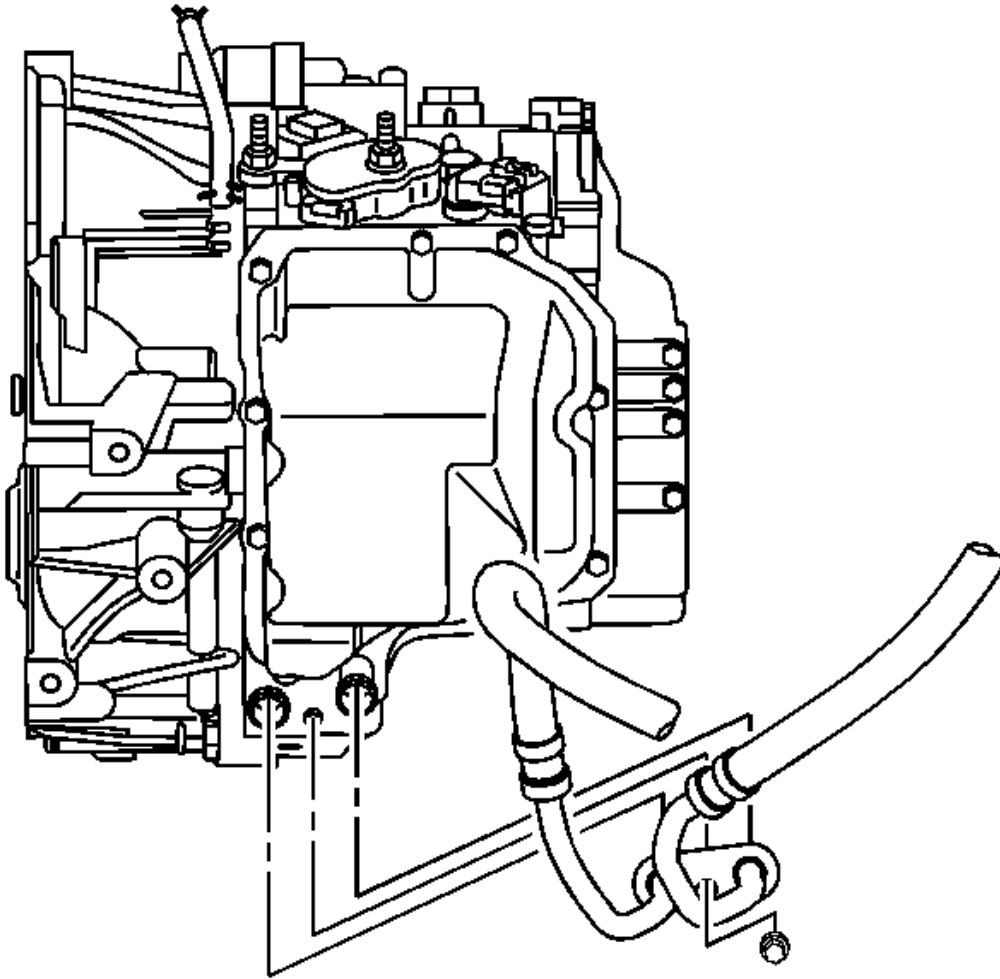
Identifying Control Valve Body Assembly & Output Speed Sensor
